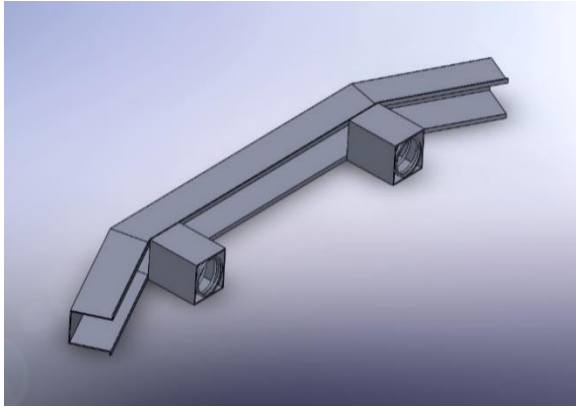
(a) Isometric View of 3 Layer Bumper Beam
